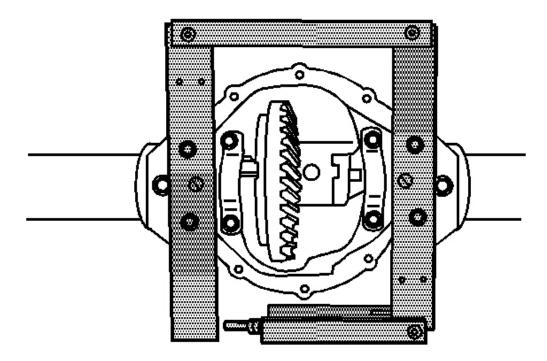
Installing J 45222 Onto Axle Housing Courtesy of GENERAL MOTORS CORP.
